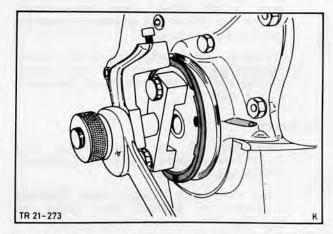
Cut out oil seal carrier, using Special Tool 21-047
